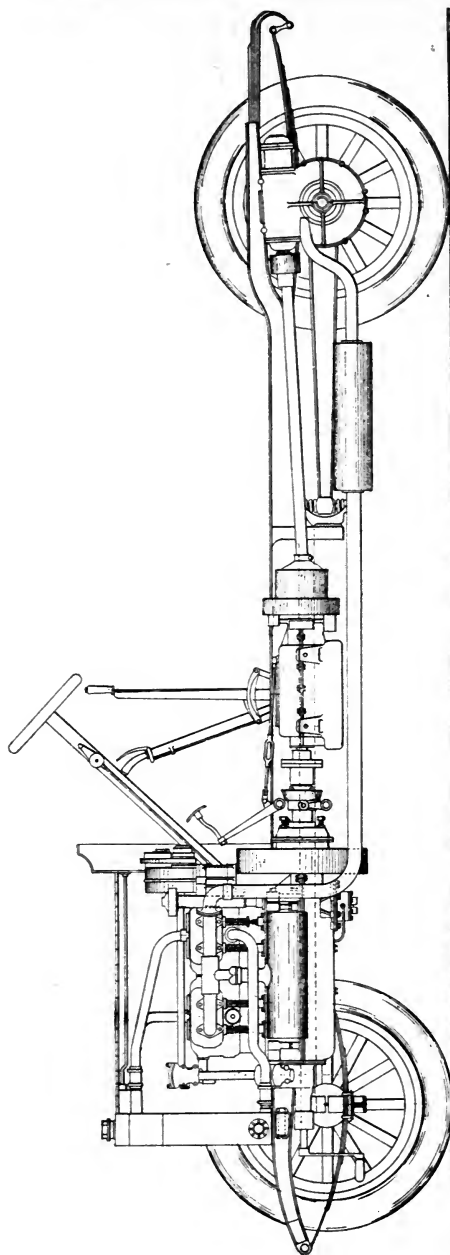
ELEVATION OF GEAR-DRIVEN CAR, WITH WORM DRIVE TO THE BACK AXLE.
